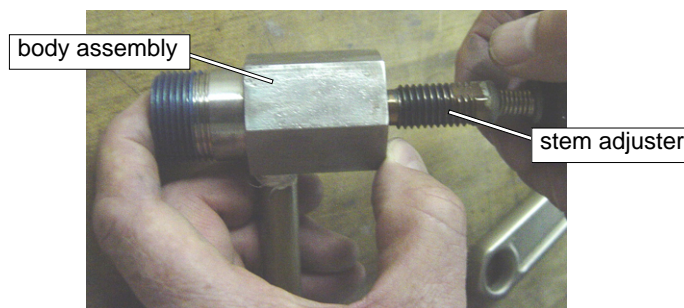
Remove the Stem Adjuster with the Pressure Adjustment Knob from the Body Assembly
